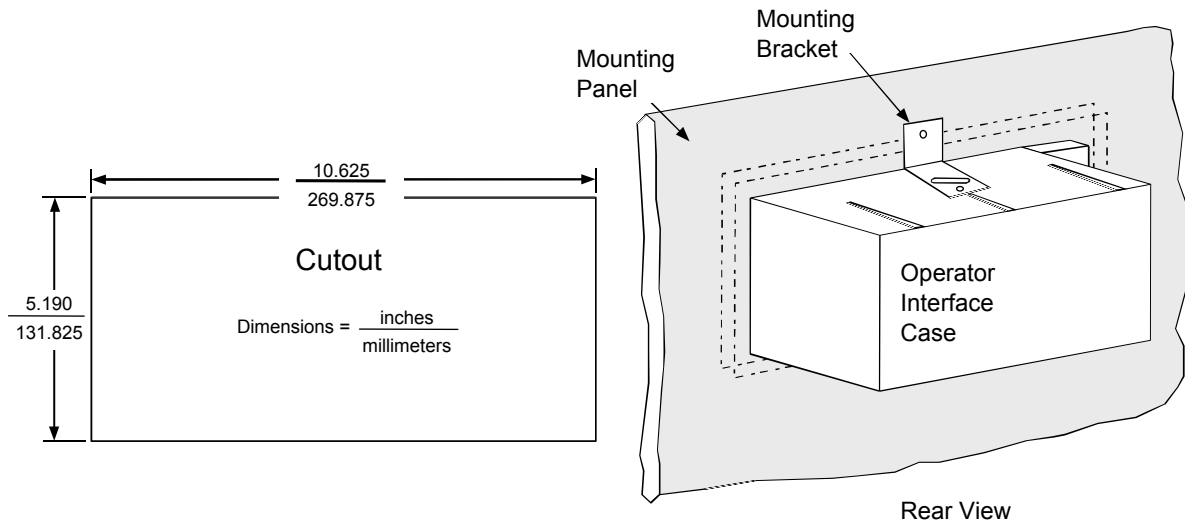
Cutout Dimensions for Operator Interface DIN Panel Mounting, Model 559-Type 12
